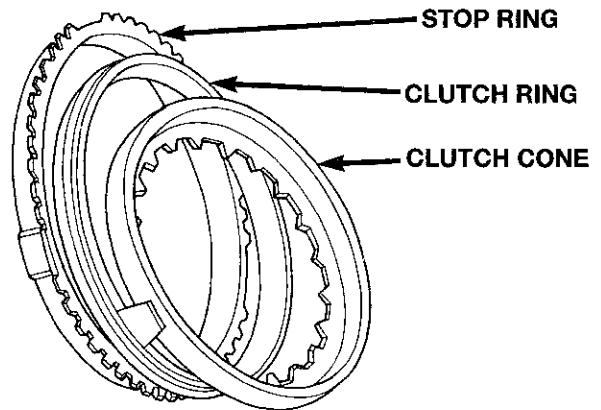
Assembling Second Gear Clutch Cone, Clutch Ring, And Stop Ring
